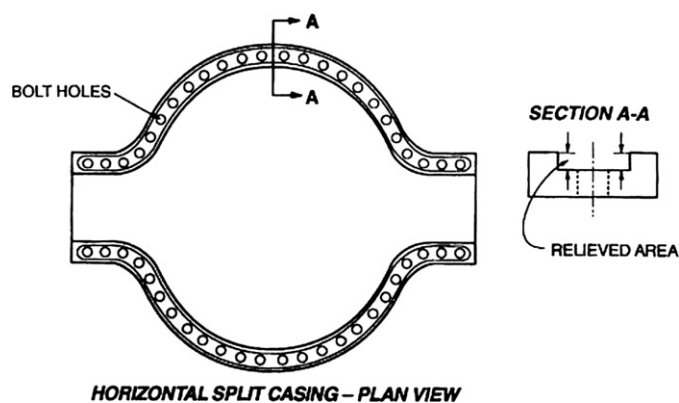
• Relieved horizontal joint – horizontal split casing – plan view
